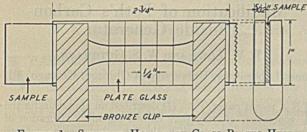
SPECIMEN HOLDER OF GLASS PLATES HELD TOGETHER WITH BRONZE CLIPS
